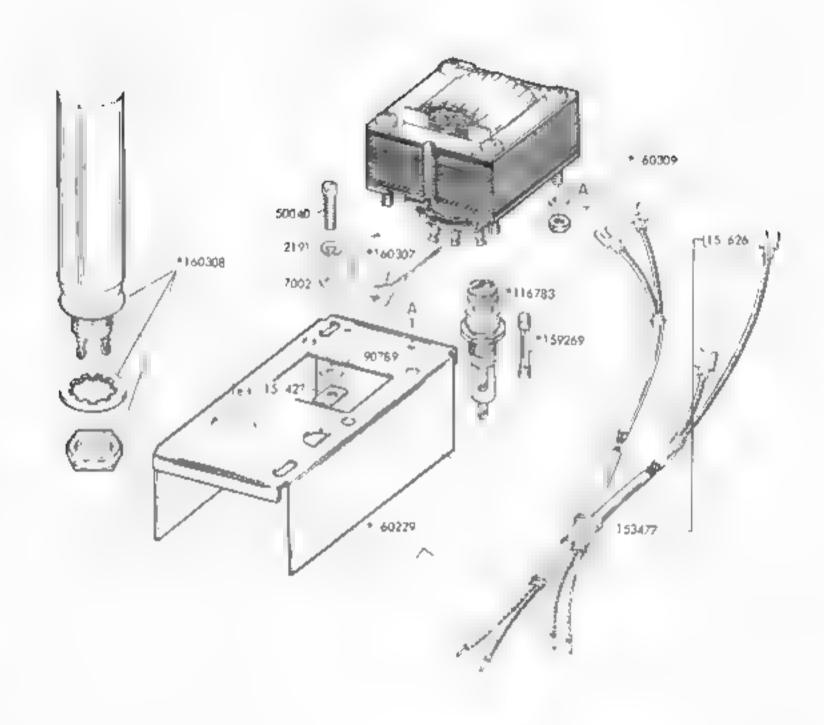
153251 ELECTRICAL MOTOR CONTROL ASSEMBLY
